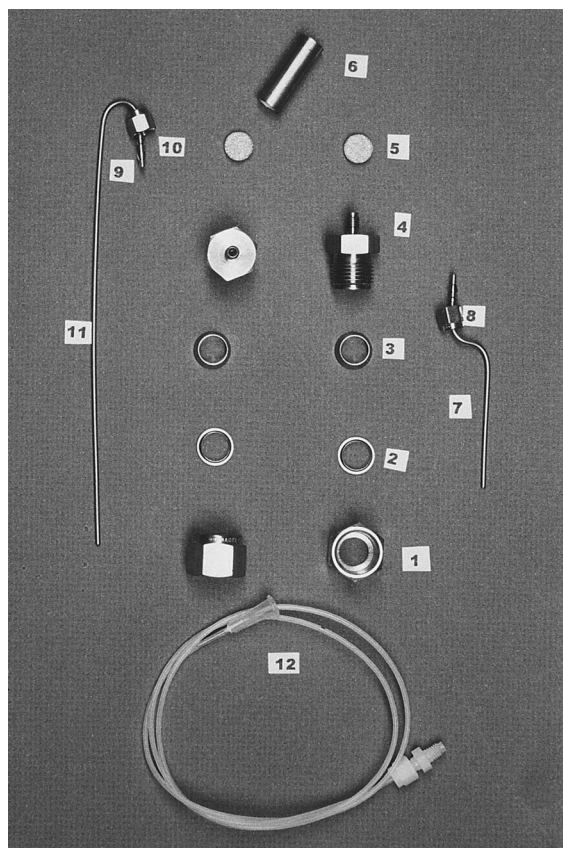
Physical components of the strontium-82/rubidium-82 generator column and infusion line used during generator's manufacture. The components (1–11) are made of stainless steel type 316. The generator column assembly consists of two 9.5–1.5 mm Swagelok reducing adaptors (4) with nuts and ferrules (1–3), one column (6), two 25 μ m filters (frits) (5) and the generator inlet (7) and outlet (11) lines which are attached to the column using 7.9 mm Swagelok nuts (8) and ferrules (9–10). The Teflon infusion line (12) is attached to the syringe pump (luer end) and to the column inlet in order to infuse the buffers through the hydrous tin oxide column.
